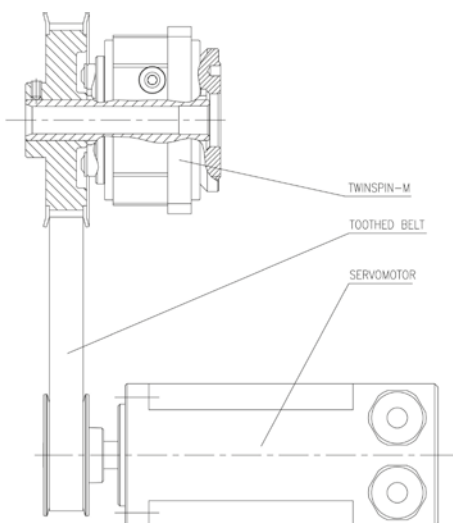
Example of use of hollow shaft version for the reducer driven by a toothed belt
